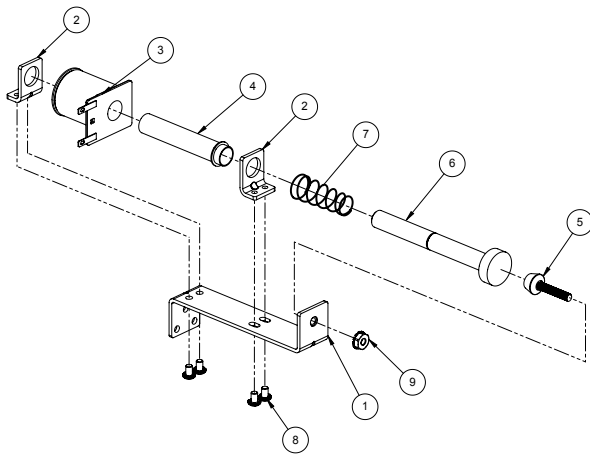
Right flipper assembly 500-6543-12-ND bottom view.
